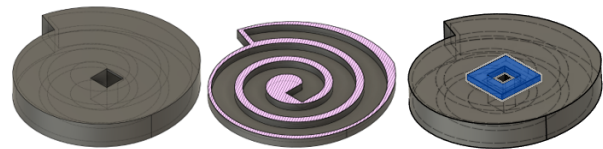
Spiral metasurface CAD design: general view (left), cross-section view (middle), extension (right).
